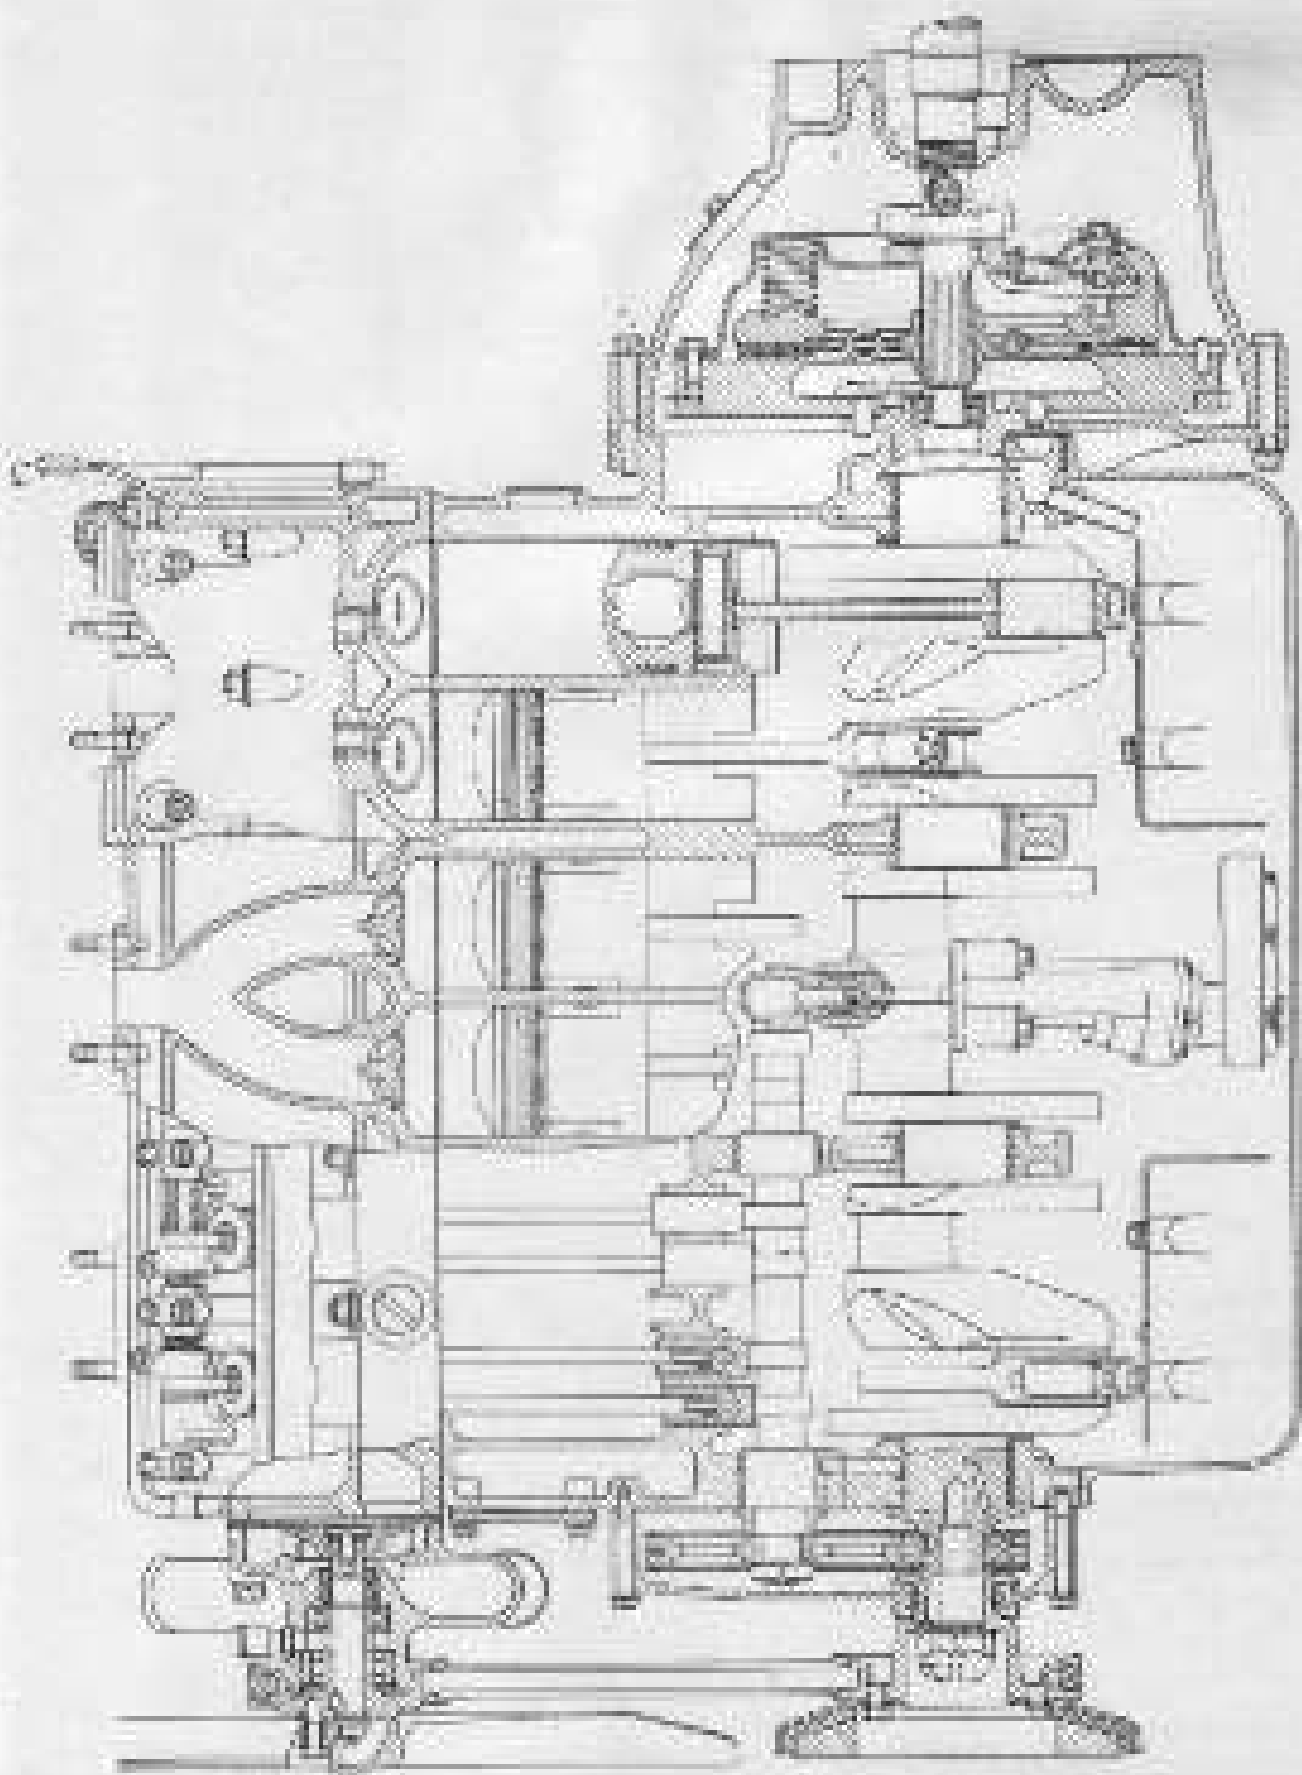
Longitudinal section view of Type 314 engine with combustion removal.
